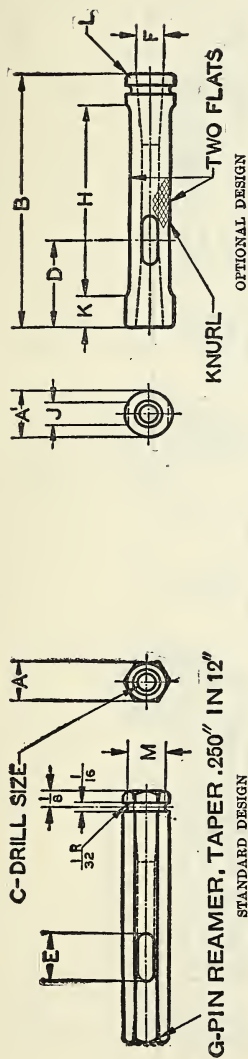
American Gage Design Standard thread plug gages, details of construction
